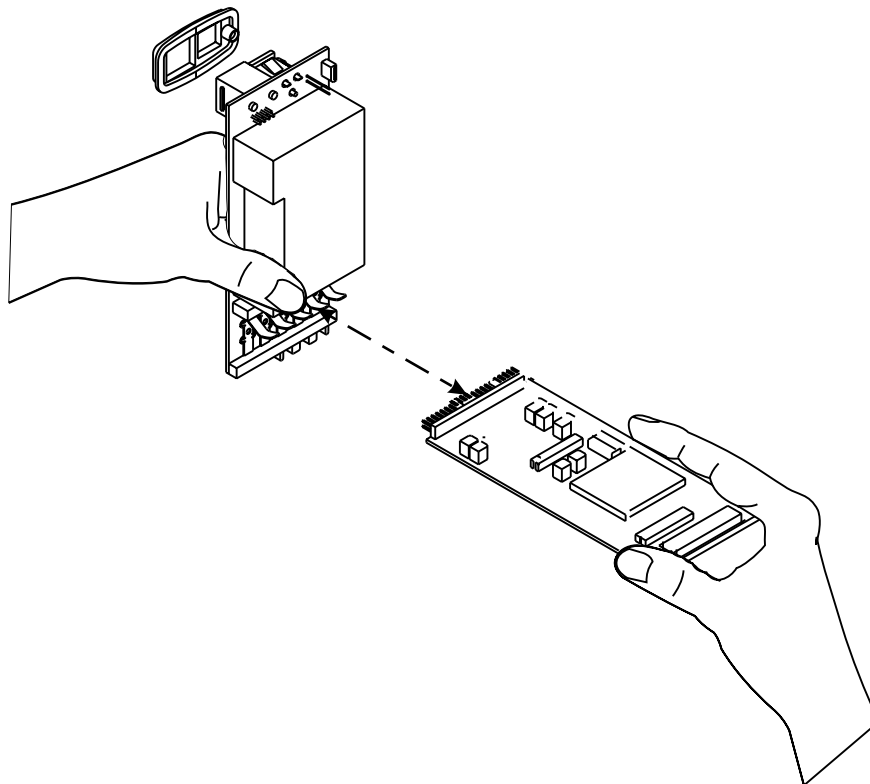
Disassemble/Assemble Power Supply Board & Main Logic Board
